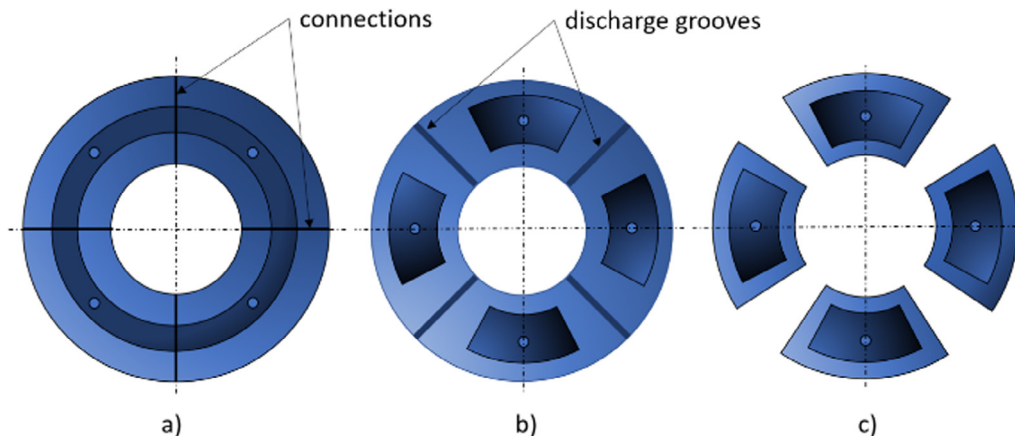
The geometry of a) single-pad single-recess, b) single-pad multi-recess, and c) multi-pad hydrostatic bearing types.
